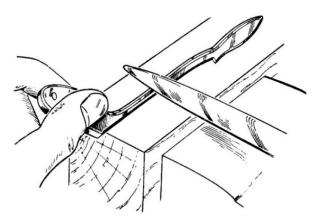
Showing Bevel or Chamfer Being Burnished
